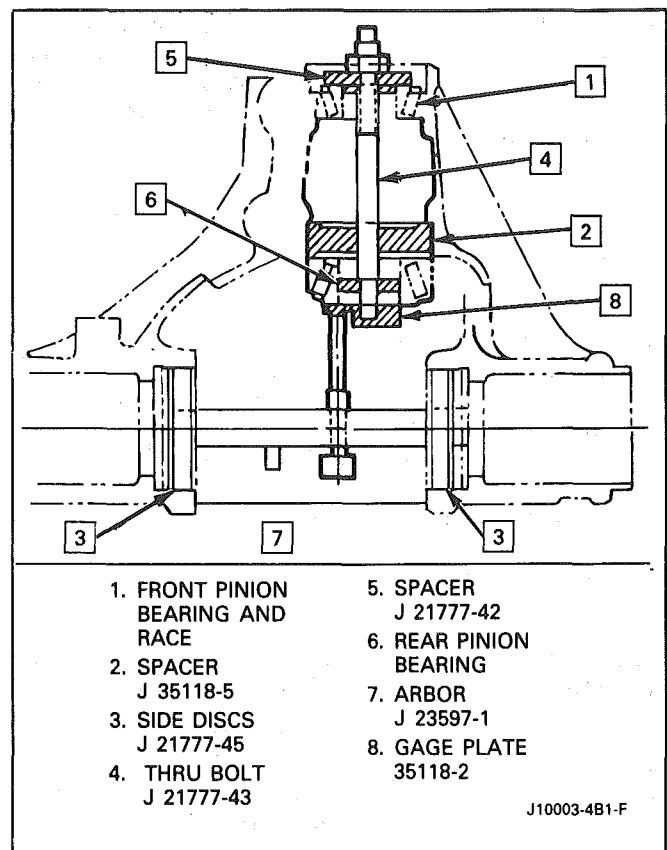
Hypoid Pinion and Bearing Shim Selection
